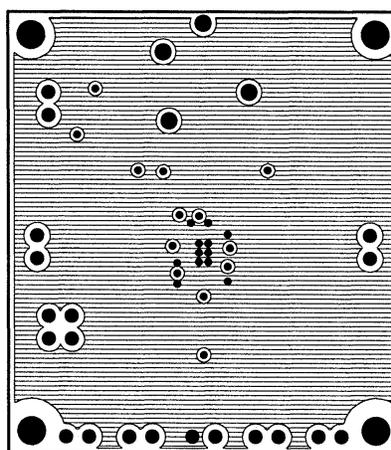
Recommended LQ PC Board Layout: Bottom-Side Layout
